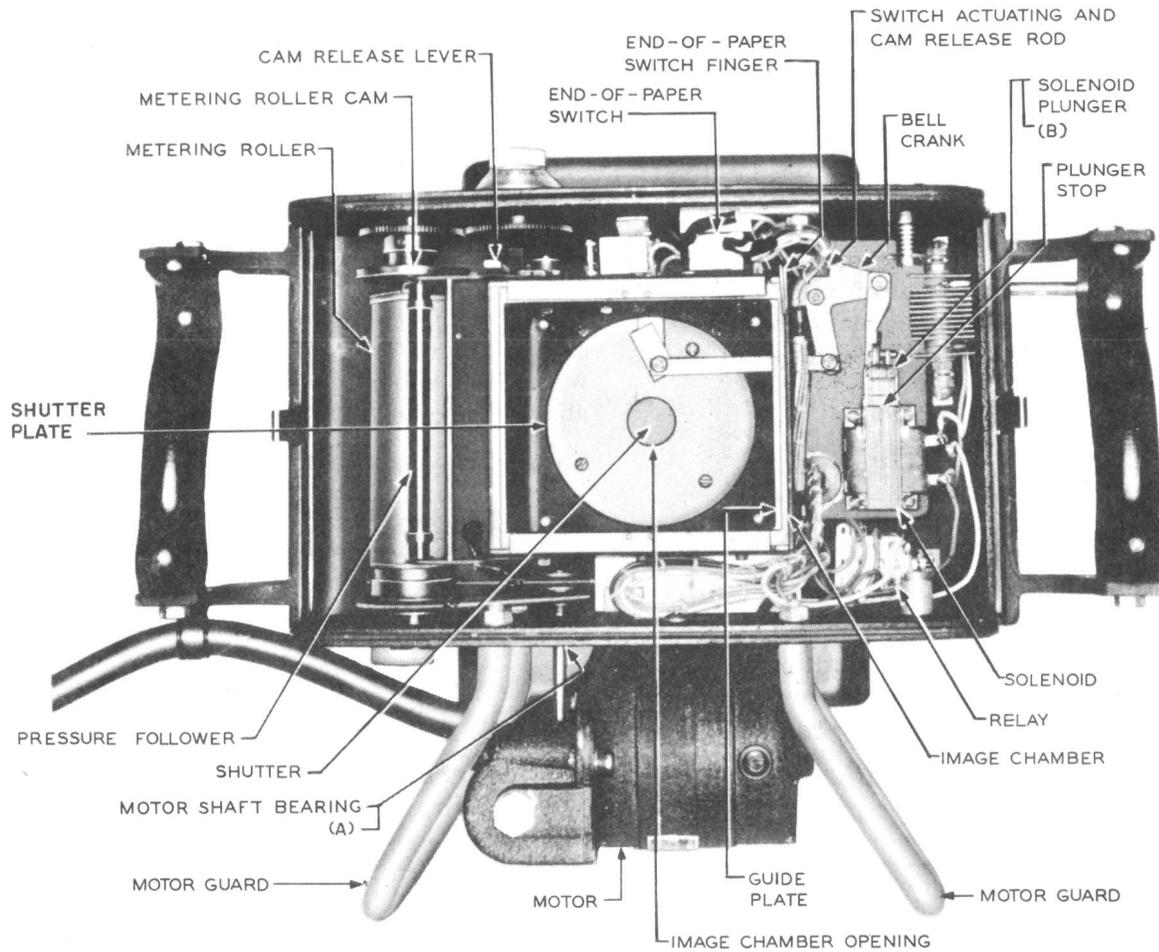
KS-14593, List 2 Camera — Cover Removed
